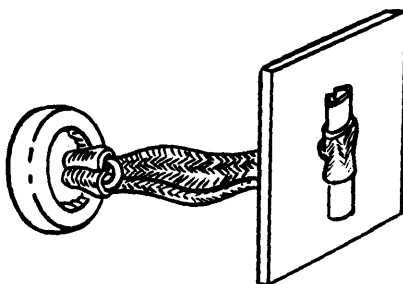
Auxiliary Seat Lower Support - Cadillac Limousine Styles
